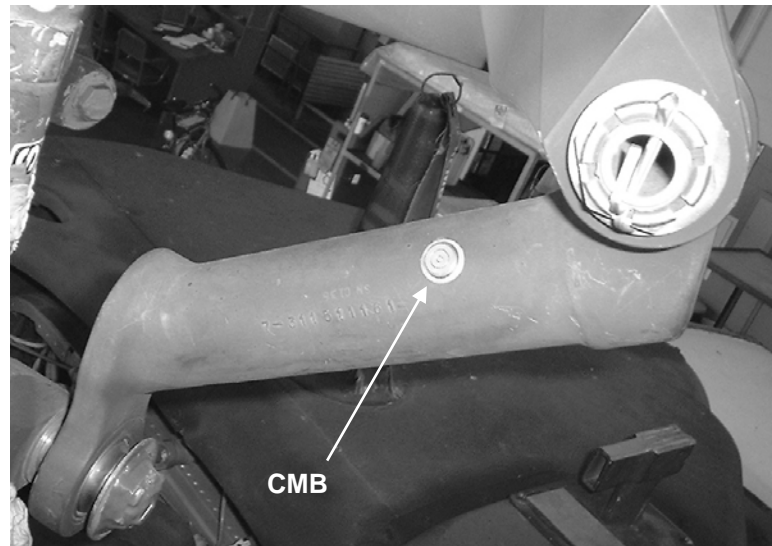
Flight Control Arm Assembly (AH-64A/D) with CMB Installed
